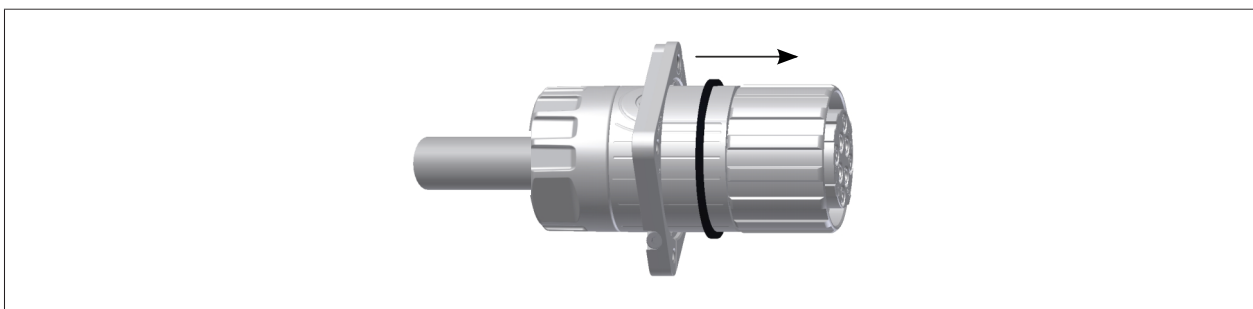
Attaching the metal flange to the connector (rear panel installation)
